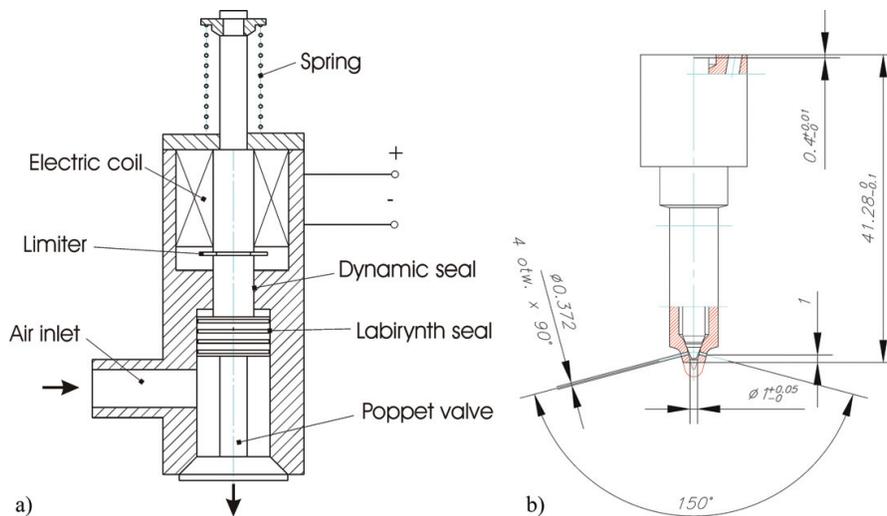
Electromagnetic valves: (a) air poppet valve controlled by ECU and electric coil and (b) utilizing of standard sprayer of CI engine.
